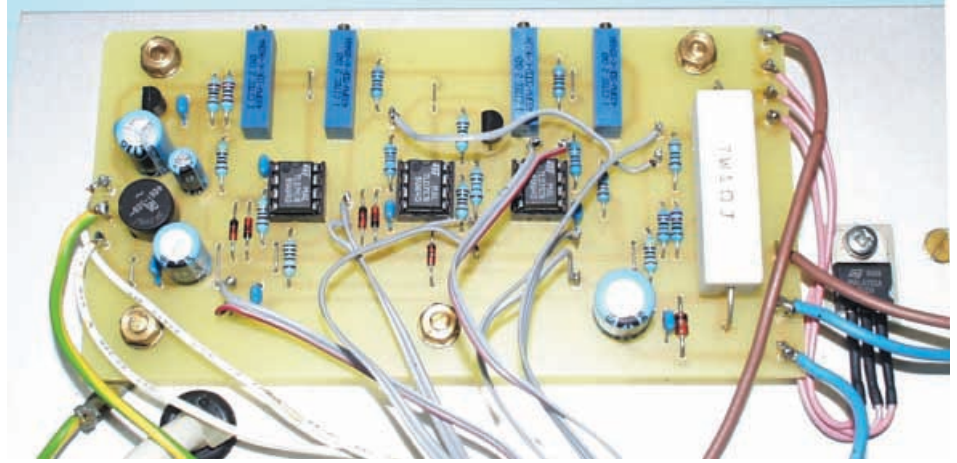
Topside printed circuit board component layout, interwiring to front and rear panel mounted components and full-size underside copper foil master. Note the MOSFET (TR1) bolted to the rear panel using an insulating kit, in the photograph above.
